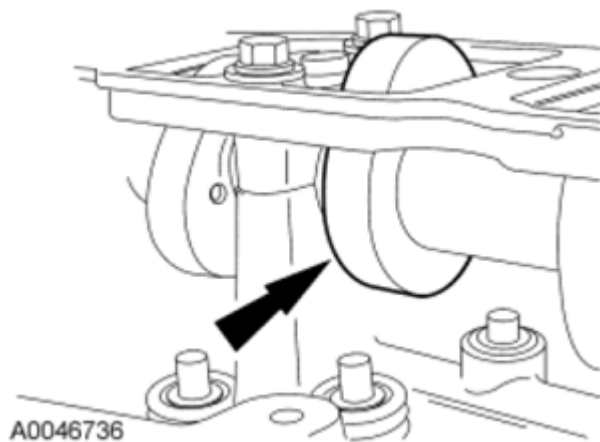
Locating Hydraulic Chain Tensioner Retaining Clip
